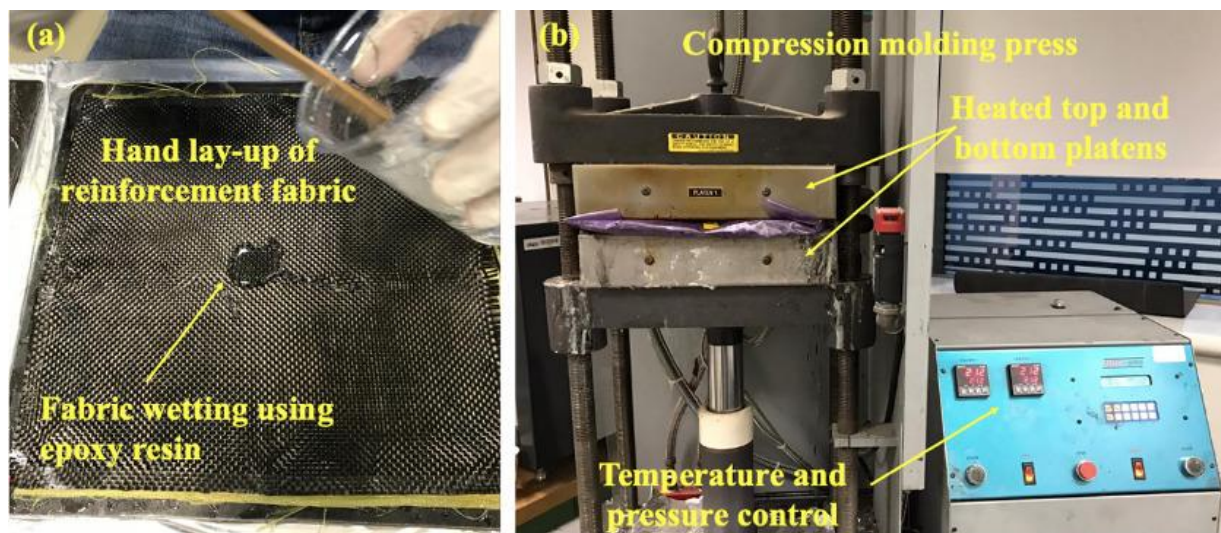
Hand lay-up and compression molding method for fabrication of FRP composites.
